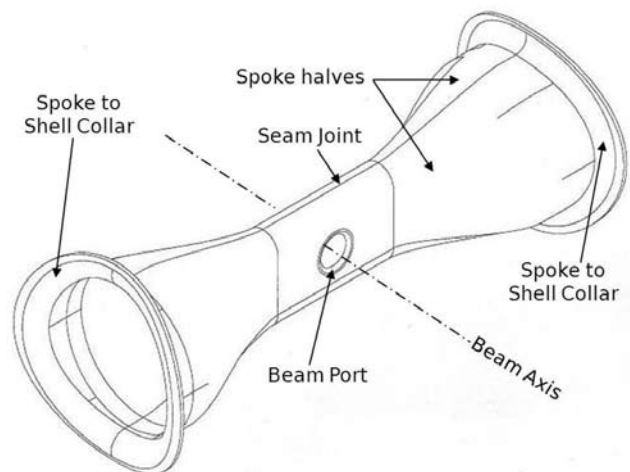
Isometric view of the Spoke assembly showing its various components.
